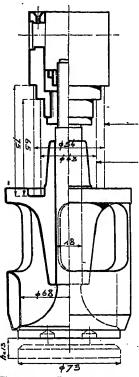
Scavenging Valve and Cage of Small Marine Sulzer Engine.
